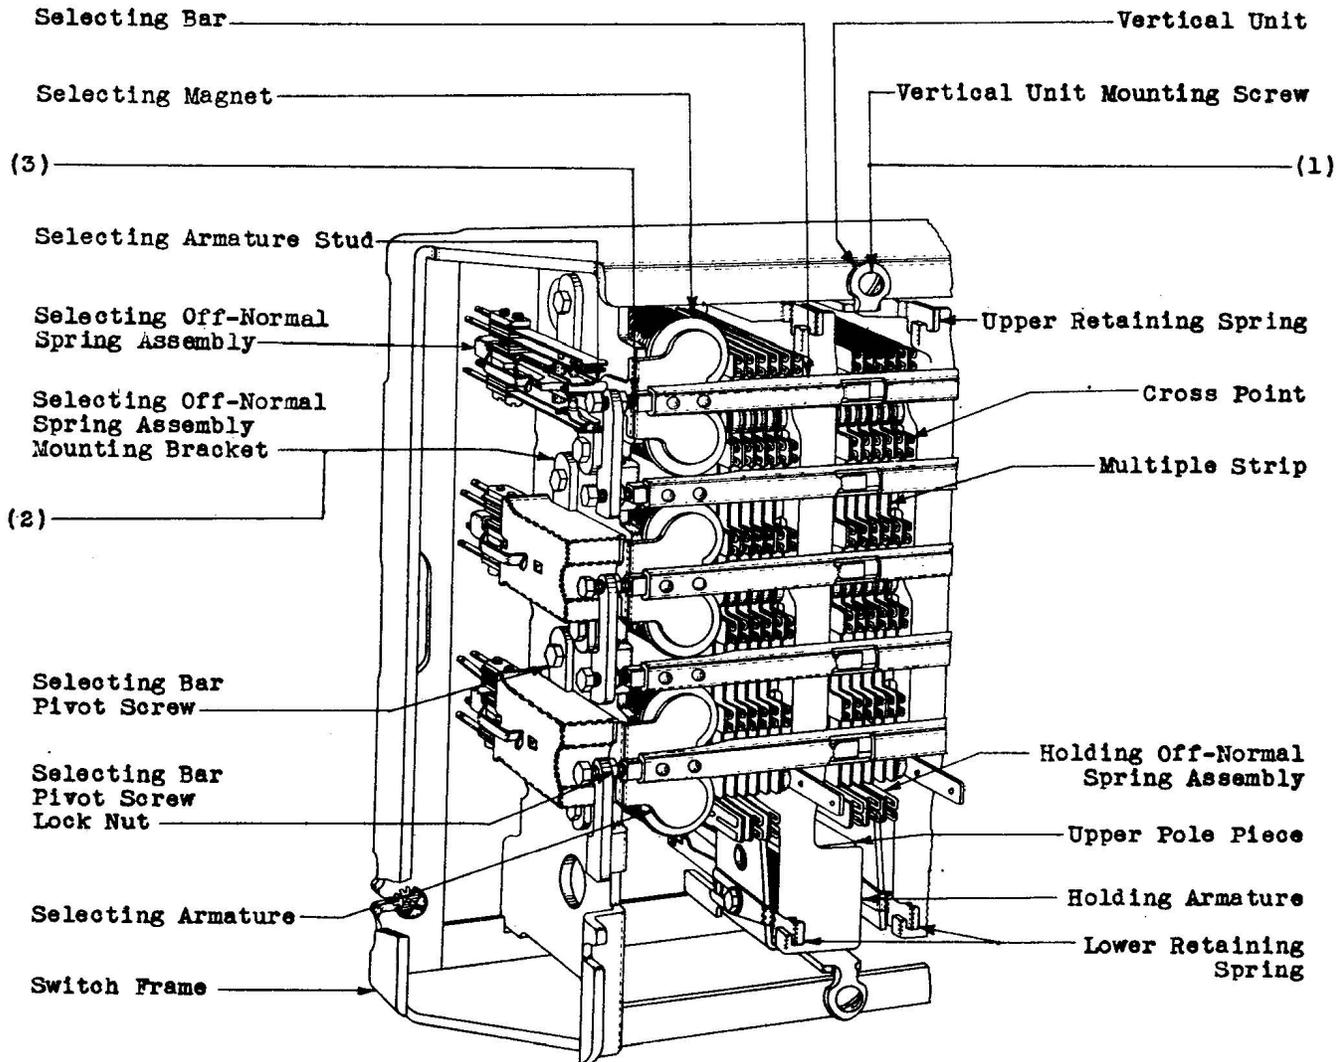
Fig. A - General View of Switch Equipped with Vertical Units Having Upper and Lower Retaining Springs
